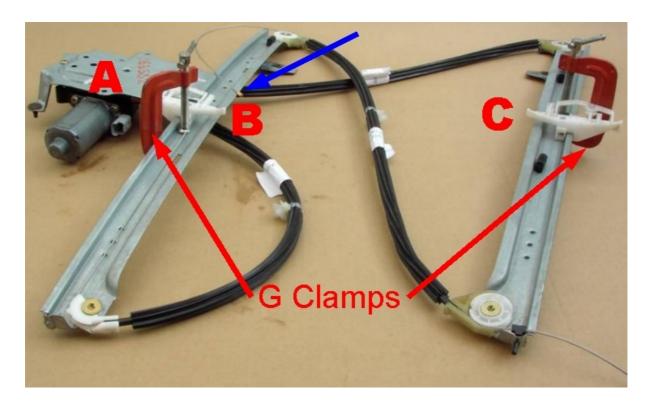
Two wire sections tensioned and sliders locked against metal track. Blue arrow pointing to stop end fitted to the incomplete wire, now about to be located in plastic slider "B". The unfinished wire end will then be tensioned and measured against the mark on slider "C"
